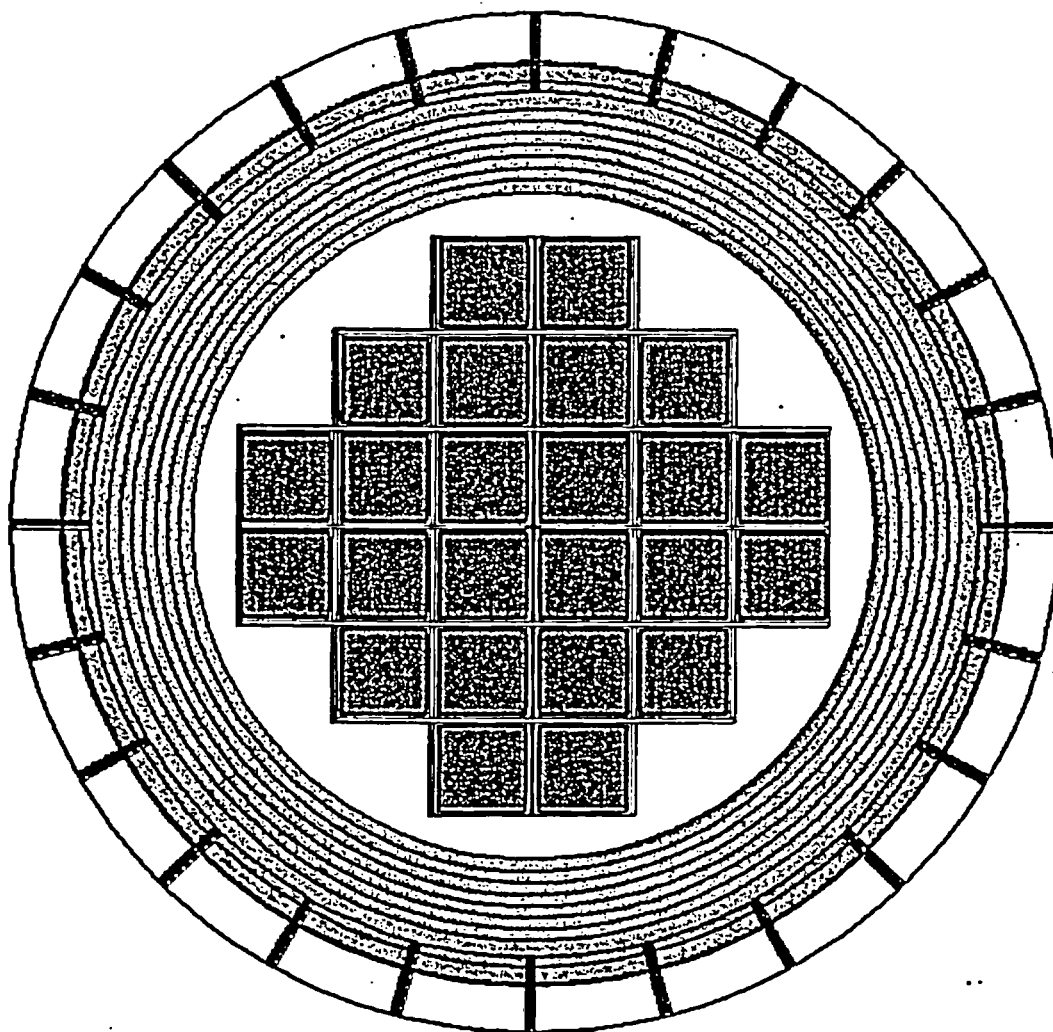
MC-10 Storage Cask Horizontal Cross Section
